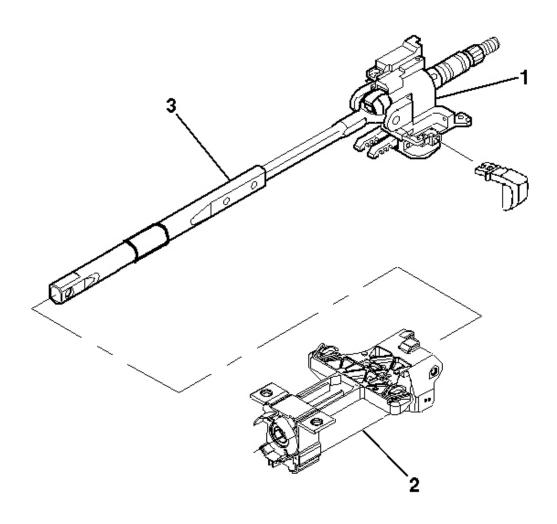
View Of Upper Steering Column Components Courtesy of GENERAL MOTORS CORP.
